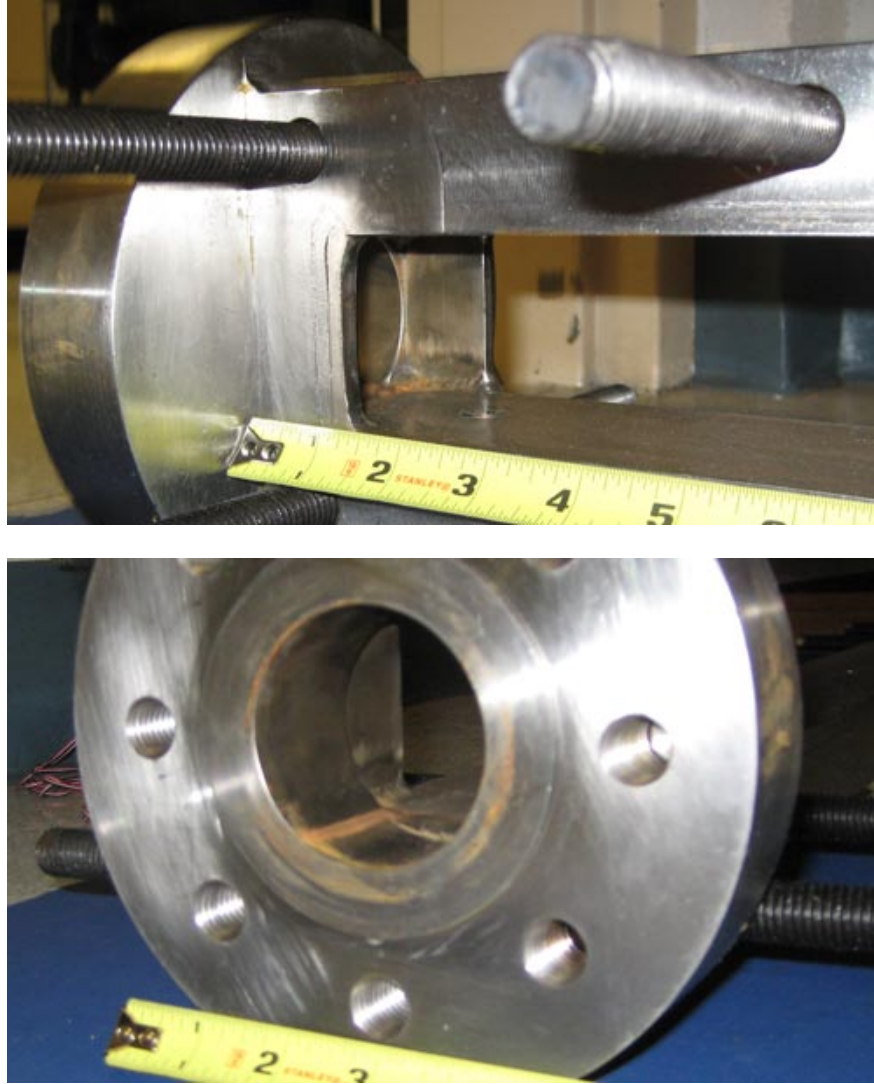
Views of end plates showing welds attaching C-channel and transition from rectangular to round cross section.
